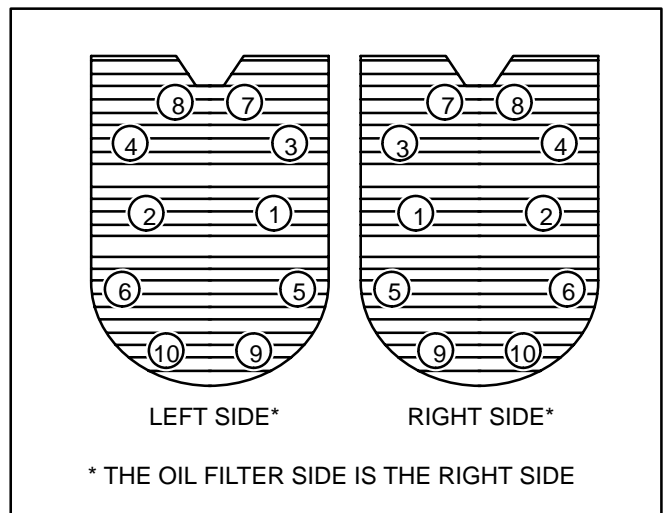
MODEL NHD CYLINDER HEAD BOLT TORQUE SEQUENCE
